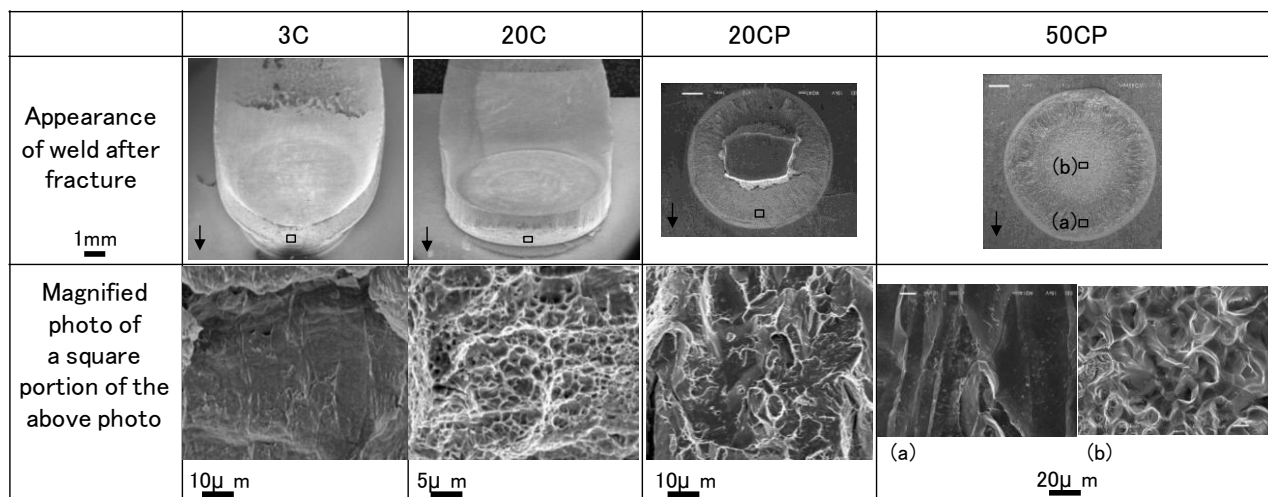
SEM photographs of fractured surface for the specimens after tensile test.
